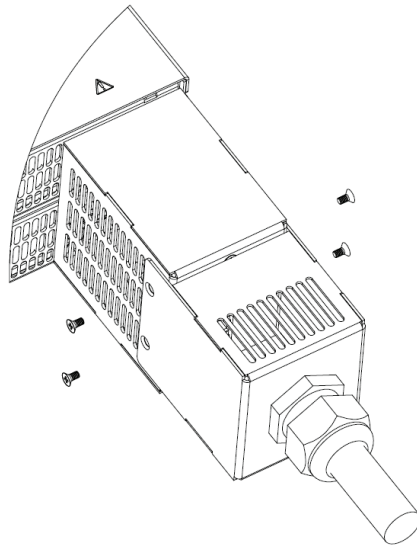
Strain Relief Assembled to 3-Phase 400/480 Power Supply Rear Panel
